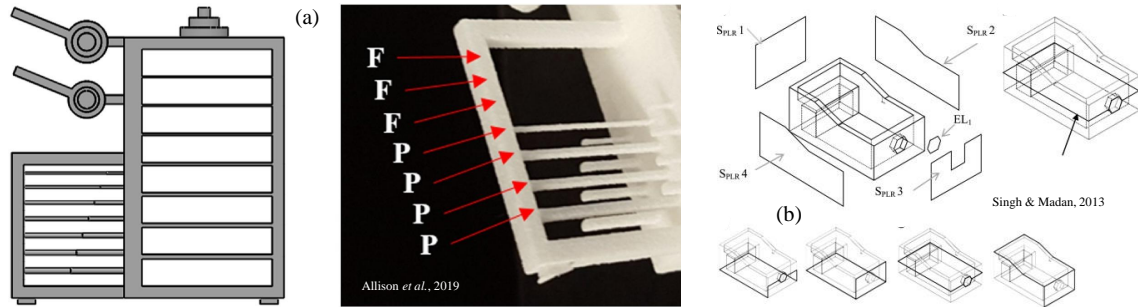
Successful examples of process-driven design cases for (a) design of a structure under additive manufacturing [162] and (b) parting line design for die cast parts [175]. (Figures © Elsevier Ltd. and reproduced with permission.)
